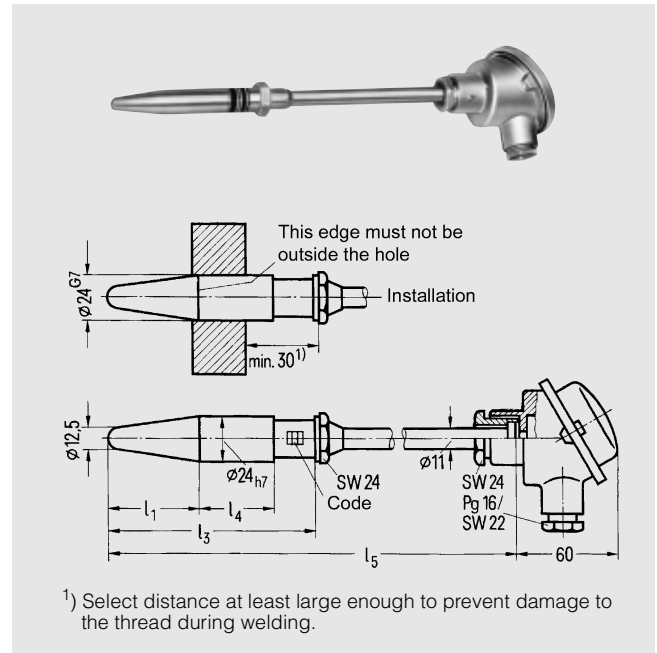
/21 High-pressure welding-type resistance thermometer with connection head and neck tube
